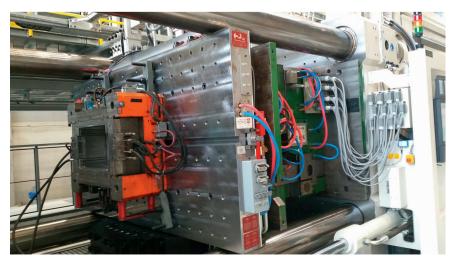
Installation situation of the hot runner adapter plate on the middle plate of the KM 2300 MXW Twin SP24500/810 machine with bolt-on unit SP3000. © A&E Produktionstechnik
